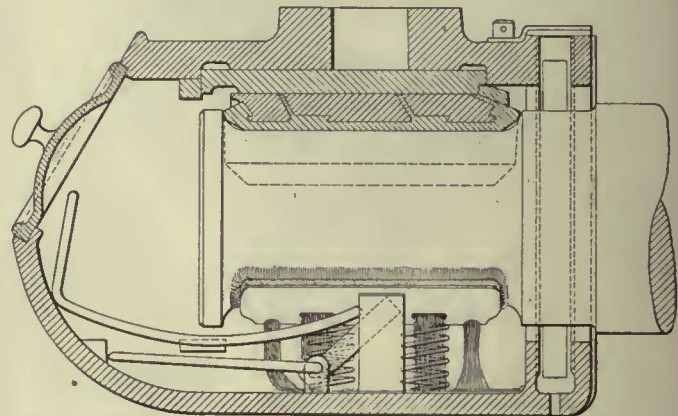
Old-Type Journal Bearing Construction Used Under German Passenger Cars
